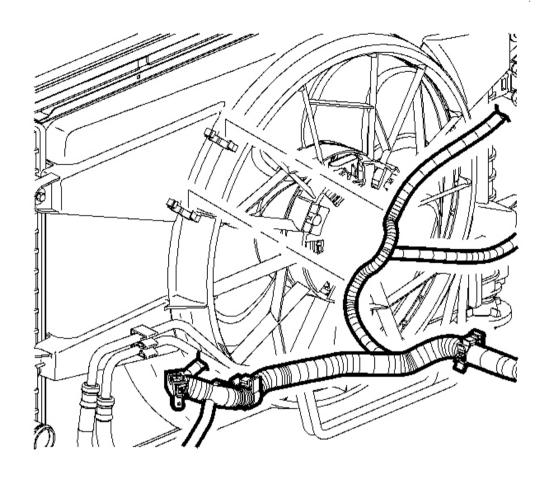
View Of Clip Wire Harness From The Fan Assembly Courtesy of GENERAL MOTORS CORP.
